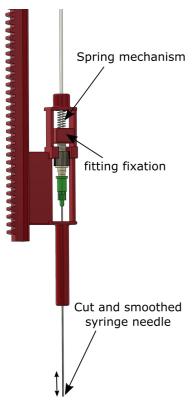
CAD drawing of the capillary holder with spring mechanism.
